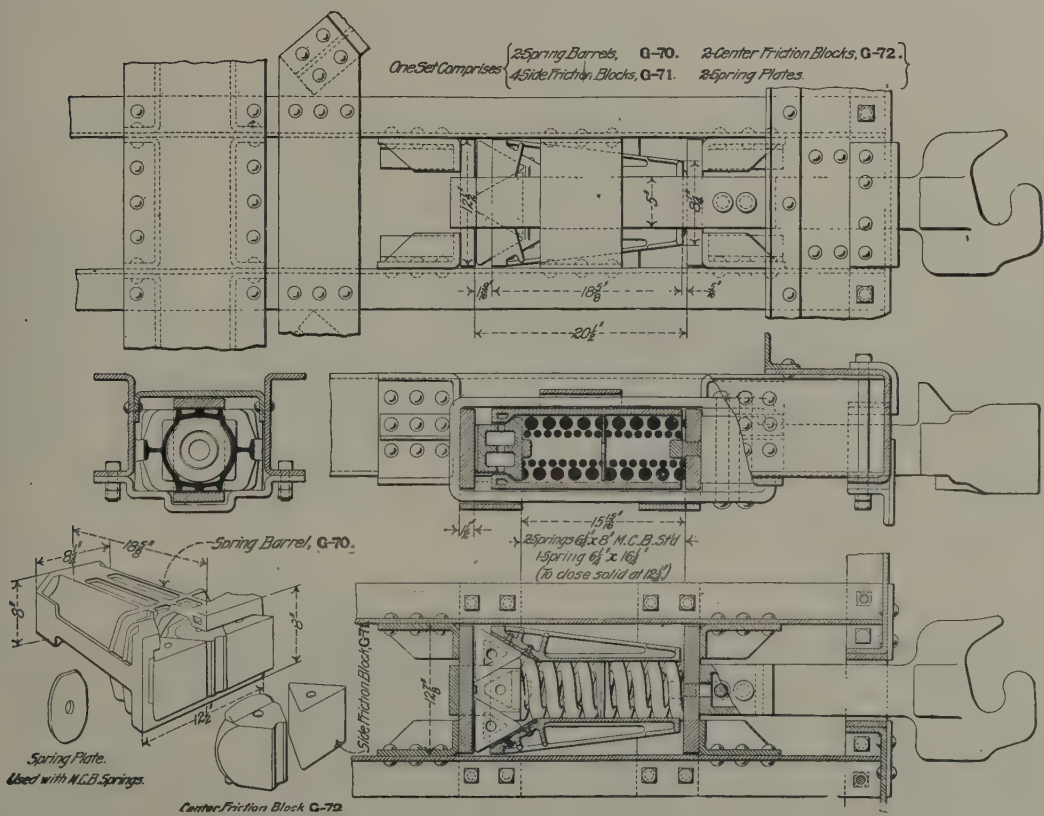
Sessions-Standard Friction Draft Gear, Type C, for Freight Cars with Pressed Steel Underframes. Standard Coupler Company.
